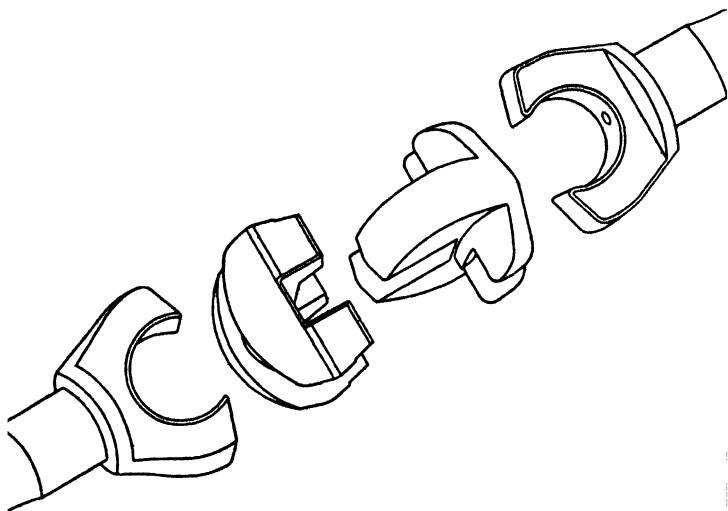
TRACTA UNIVERSAL JOINT ("EXPLODED" VIEW).
